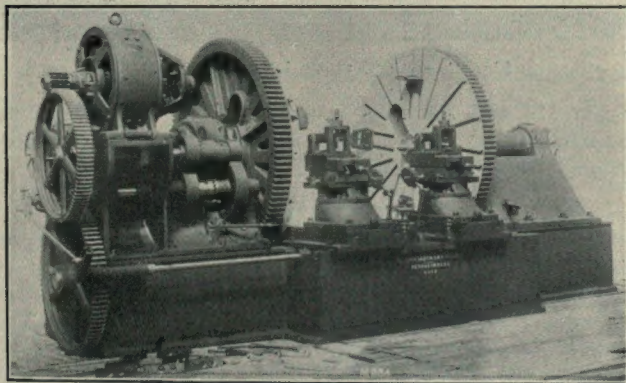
Redesigned Locomotive Wheel Tire Lathe
